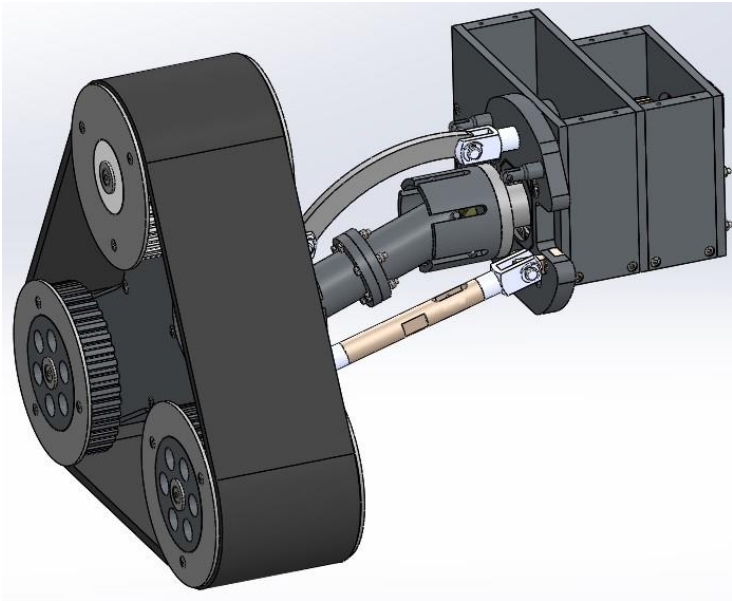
Gearbox And Wheel Connection with Balance Arms
